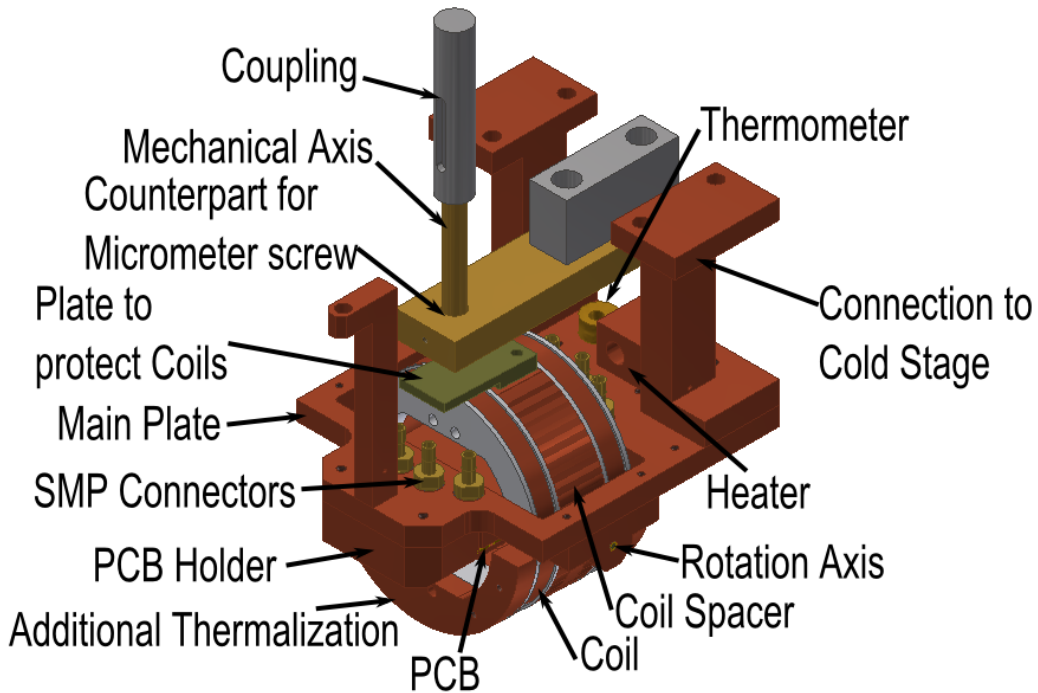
The final design of the sample holder. The sample will be placed on the PCB holder inside of the coils.
